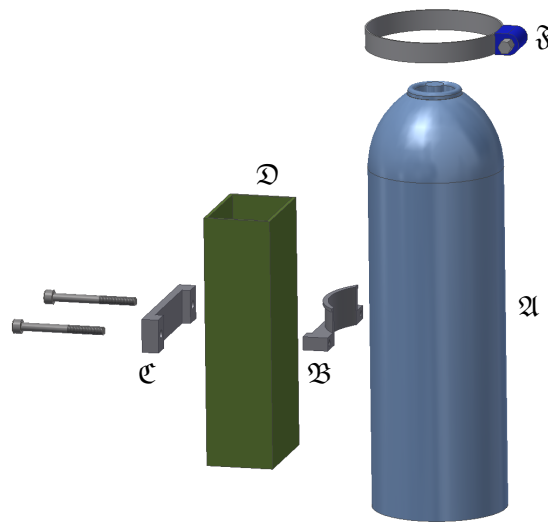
Assembly to Hold Minicans — Minicans^a (A, blue) can be added to the setup by a pair of fasteners (B, C) clamped to the frame (D, green). The can itself is held by a large hose clamp^b (F).
